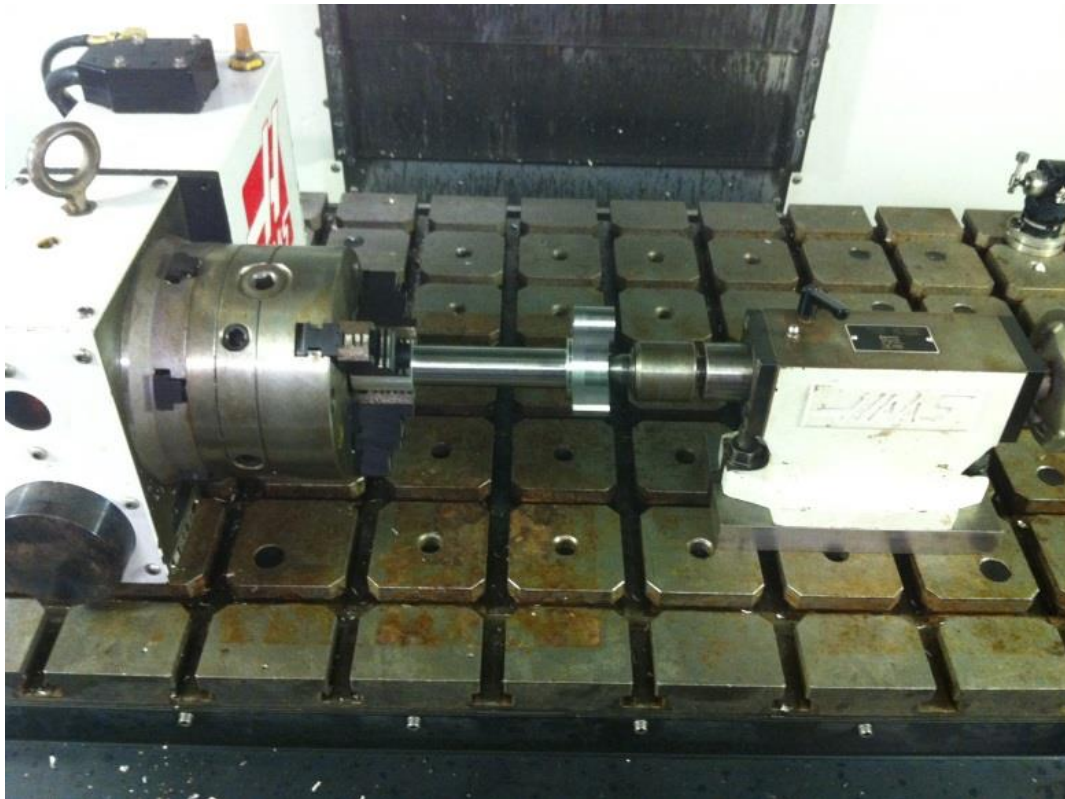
Crankshaft Fixtured For 4th Axis Milling
